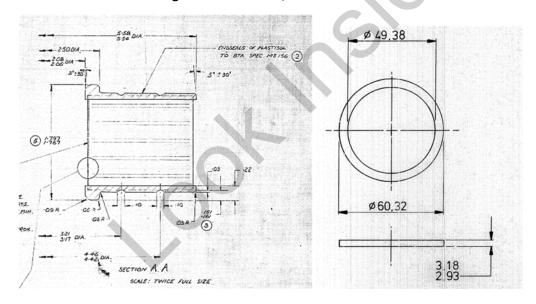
Air cleaner element AYA2127 and sealing ring 12A1433.
